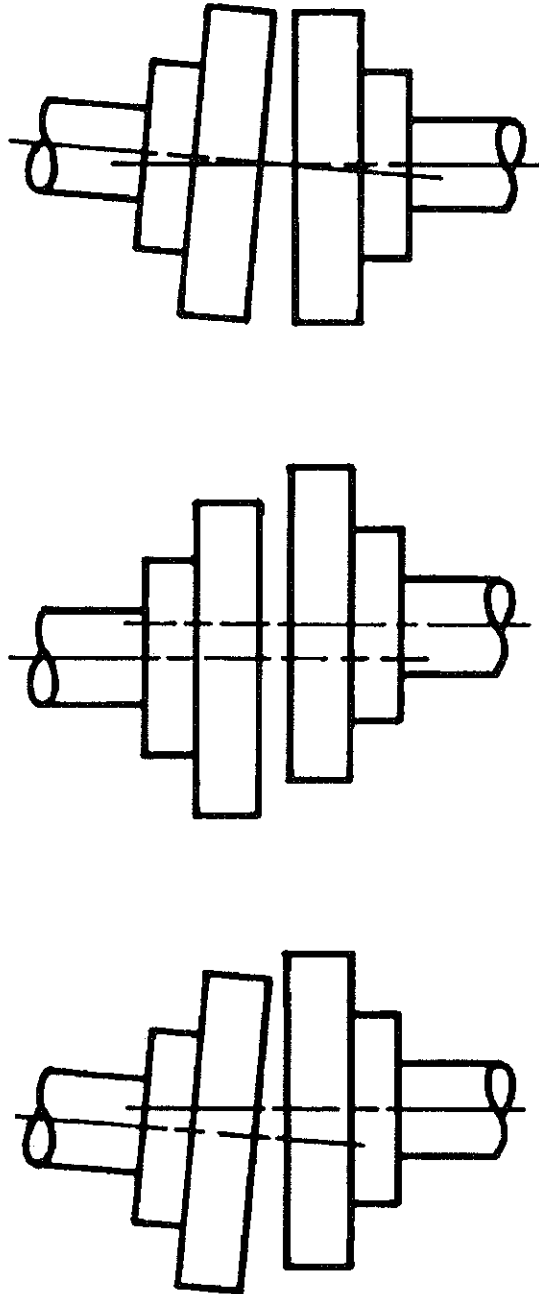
Misalignments: Top, Angular; Center, Parallel; Bottom, Both.
